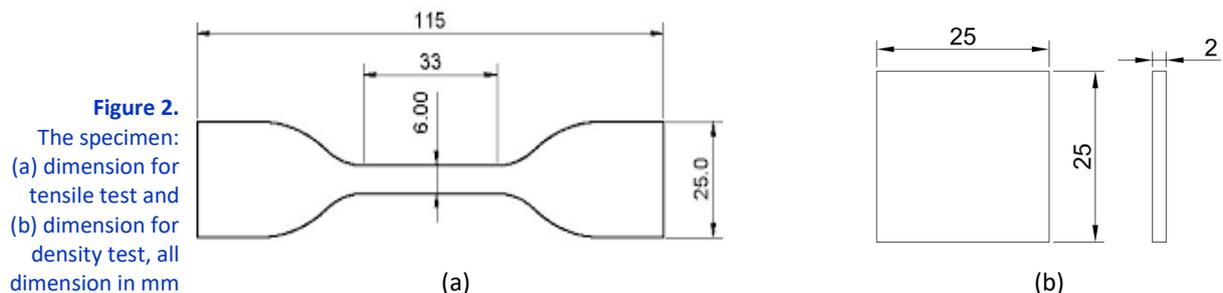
The specimen: (a) dimension for tensile test and (b) dimension for density test, all dimension in mm
